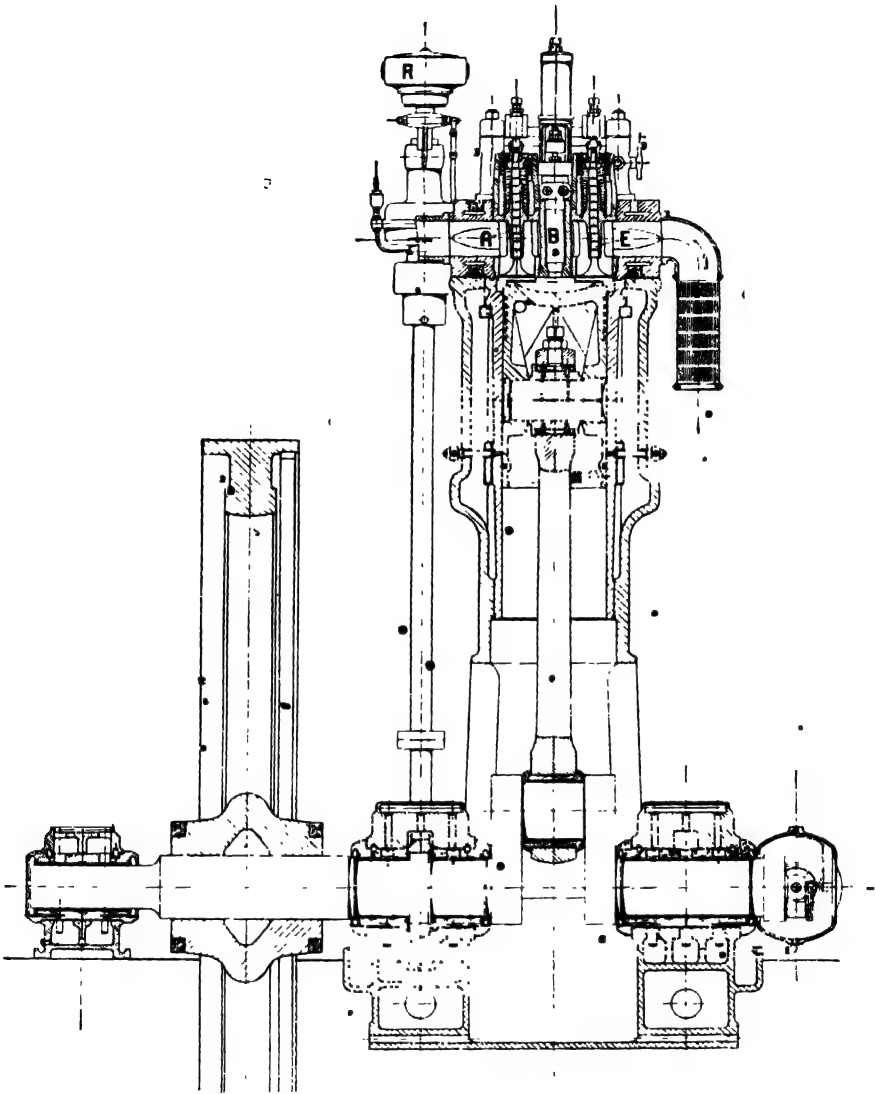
Section of a Typical Four-cycle Diesel Engine
